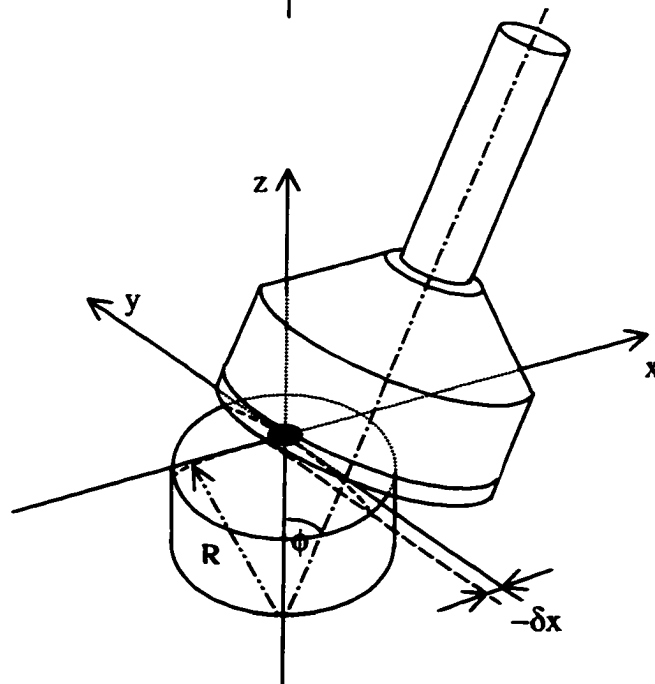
Perspective views of the grinding setup with x-direction tool misalignments:
